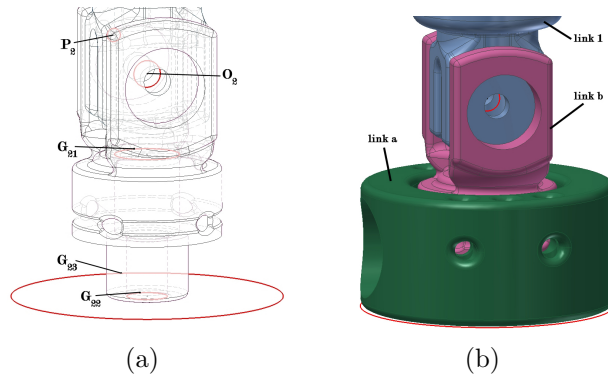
a) Cable contact points of ‘ tJ_2 ’ and b) assembly for control of DOF {2}
